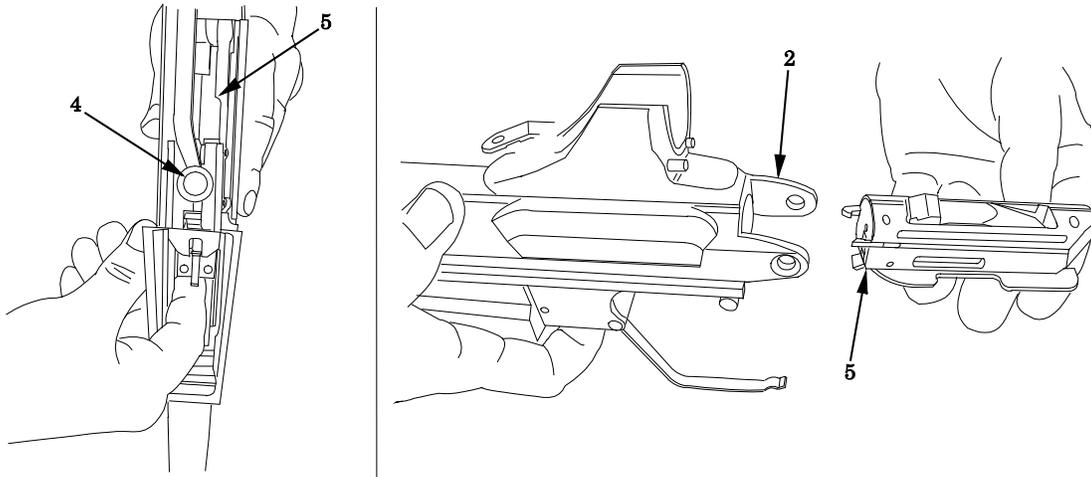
Removal of Bolt/Bolt Carrier Assembly.
